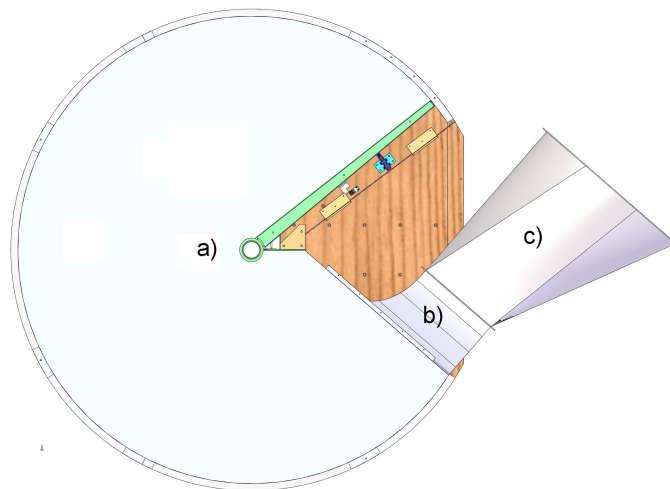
Plan view of PWG (Dresser-Rand Company Ltd 2014)
